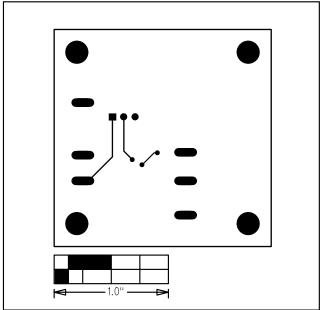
MAX1819 EV Kit PC Board Layout—Solder Side
